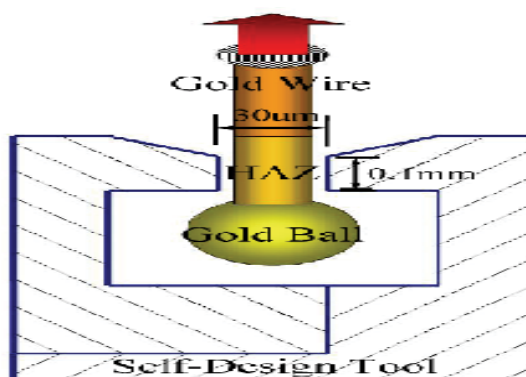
Self-design tensile test fixtures for EFO wire (HAZ).
